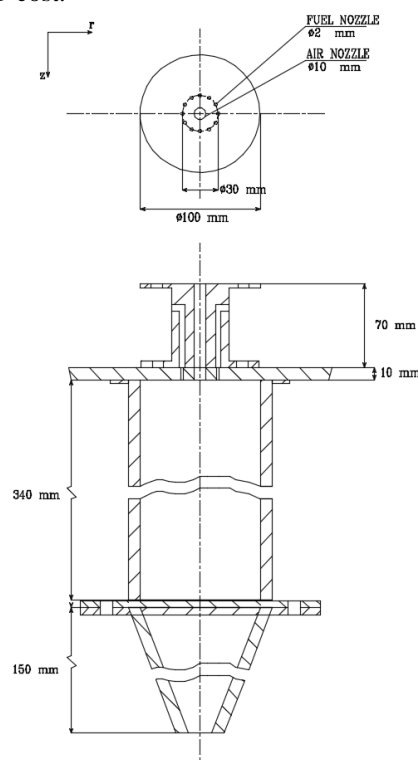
Schematic drawing of the combustor (Verissimo et al. [17,31])
